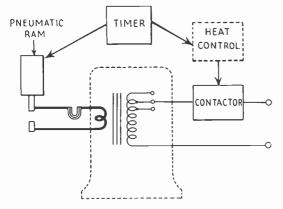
Schematic diagram of a pneumatically operated spot welding machine.
